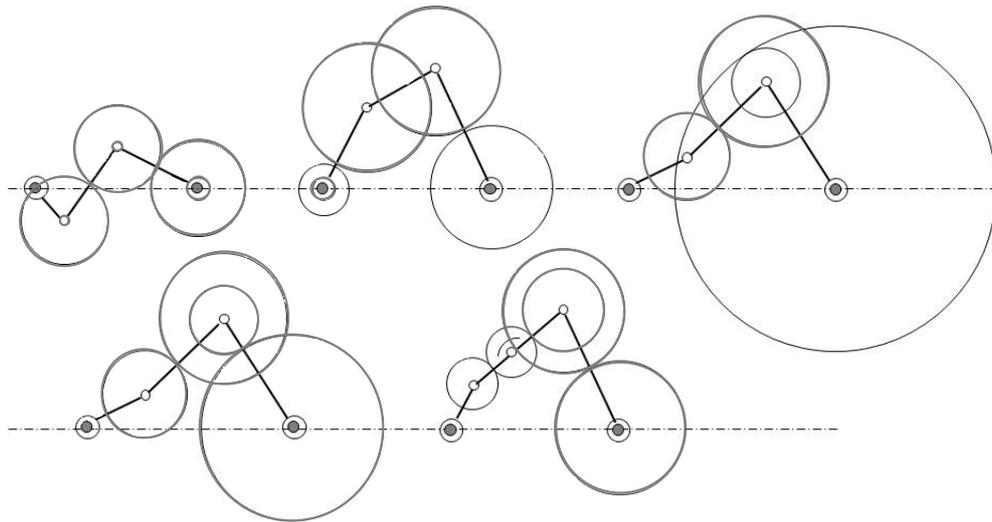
Schematic of rods and gears constructed on the basis of the four-tiered bar mechanism
